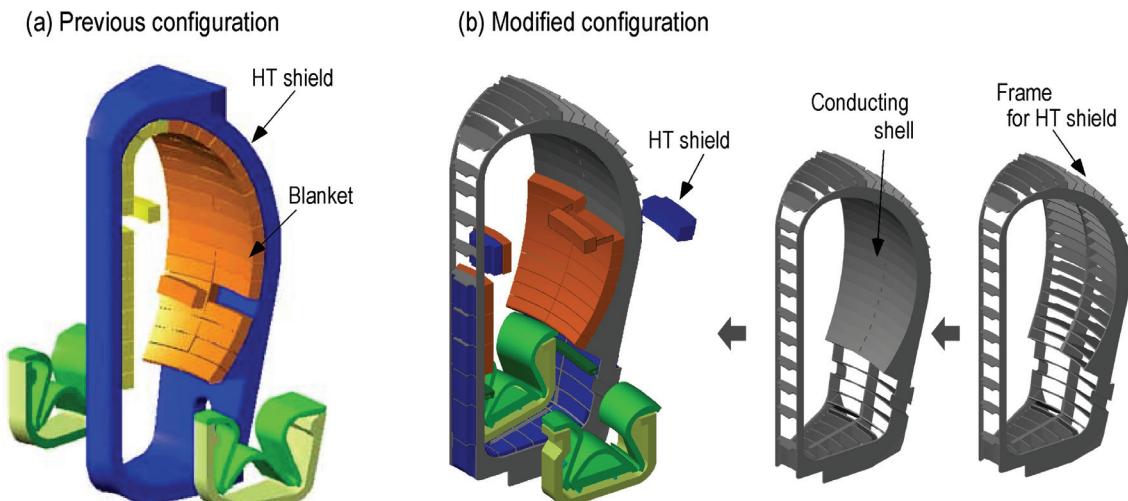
Assembly concepts of power core components: (a) previous concept of HT shield with poloidal ring structure and (b) modified concept composed with small HT shield blocks.
